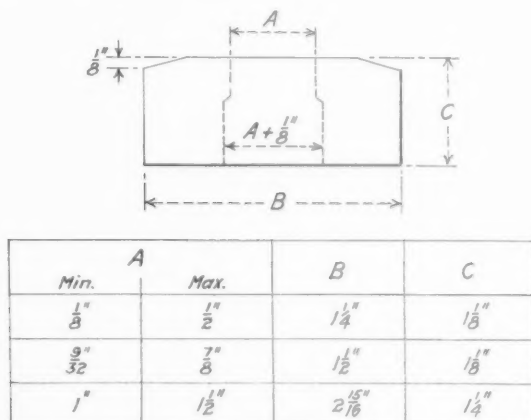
Boiler Punch Dies Reduced to Three Sizes
